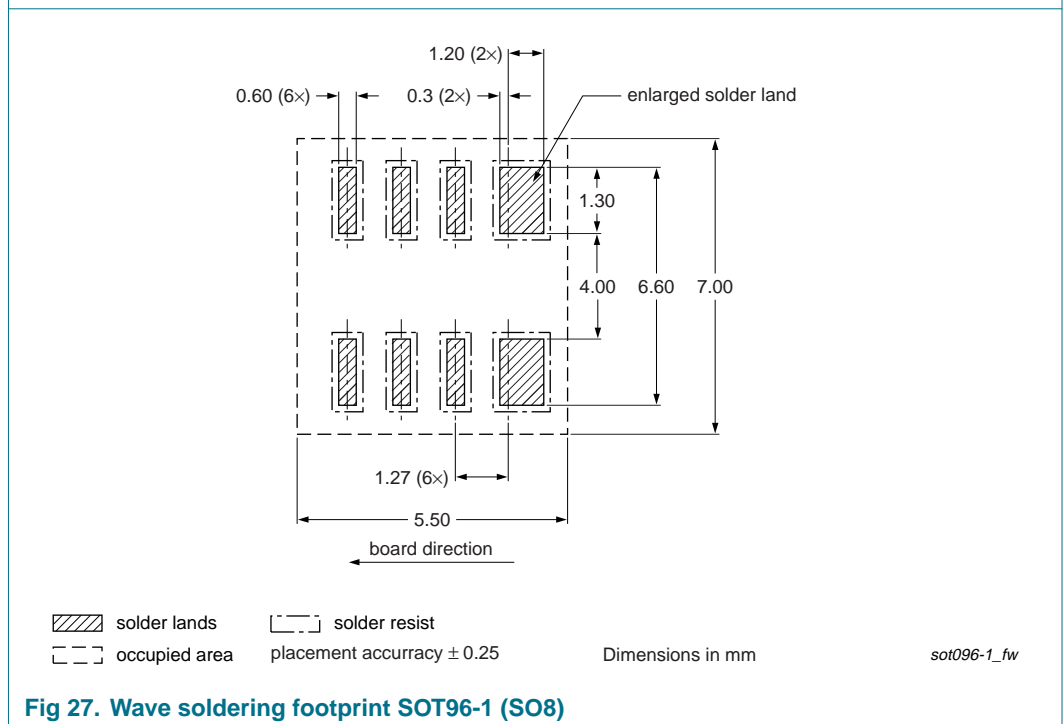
Wave soldering footprint SOT96-1 (SO8)
